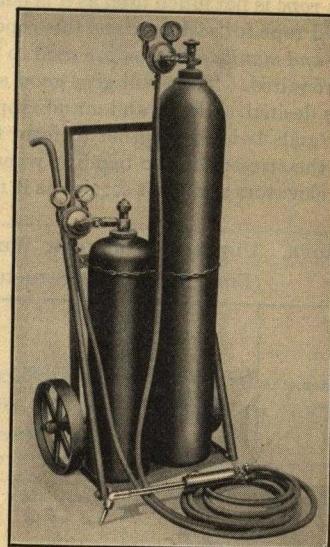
Portable acetylene gas cutting plant, The Alexander Milburn Co., Baltimore, Md.
